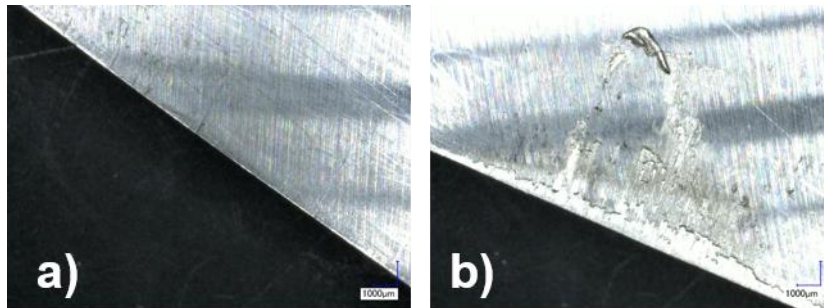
a) Unused cutting tool; b) Contaminated cutting tool after 5 cuts
